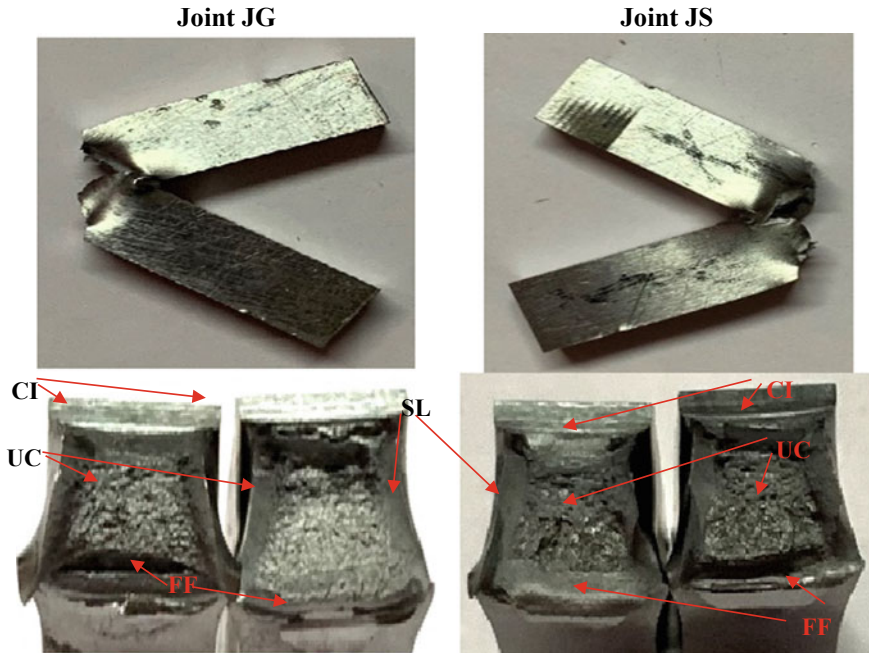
Optical fractographs of fractured Charpy V notch impact specimens of the welded joints; CI—Crack initiation, SL—Shear lips, FF—Final fracture, and UC—Unstable crack region
